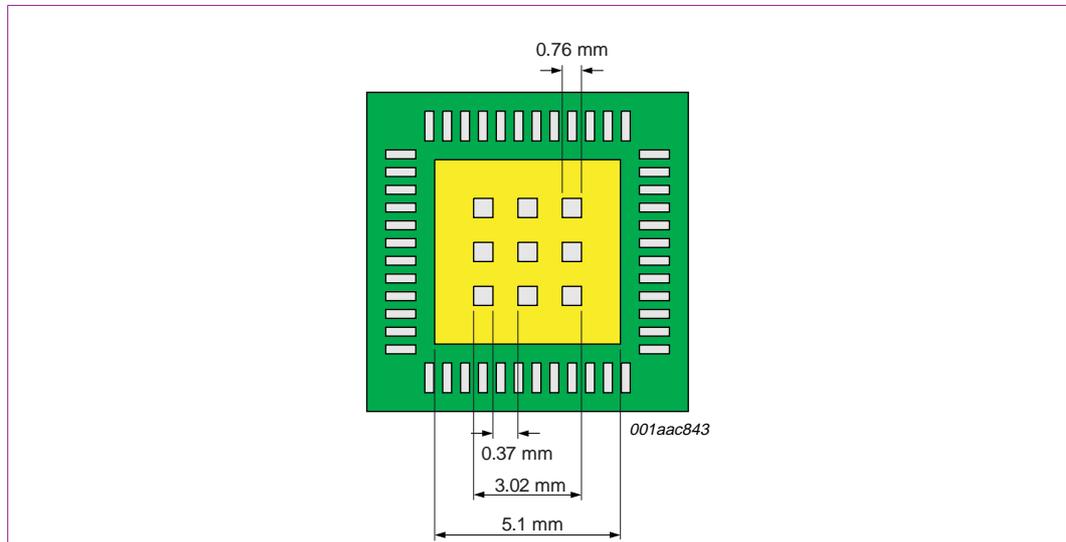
Solder paste dimensions on the land area for an exposed die pad of HVQFN48
